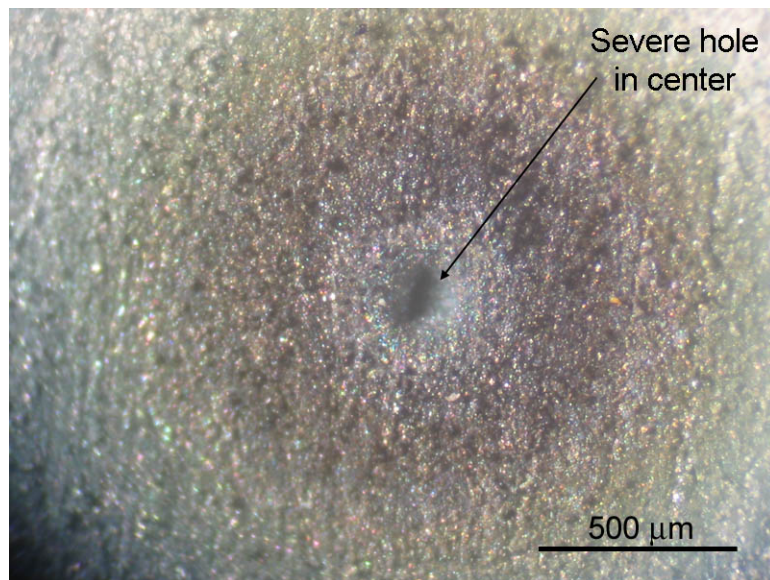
Sample 3 of Mo-2F showing severe hole in deposit center
